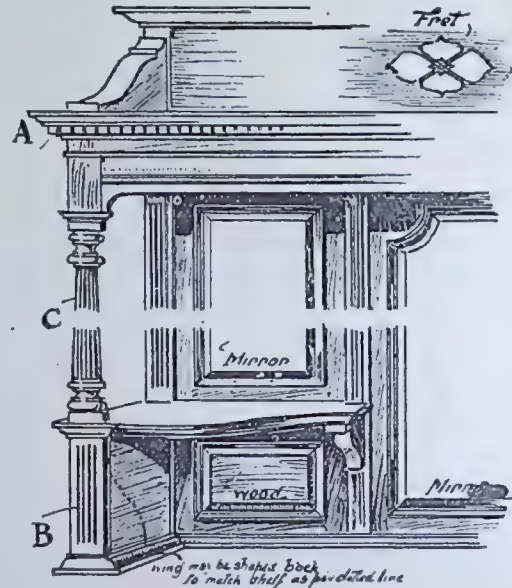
DETAILS OF SIDEBOARD BACK (No. 382.)
